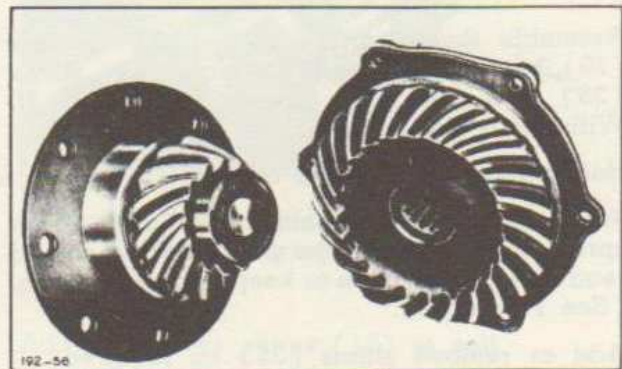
3rd Reduction Gears Removed to Note Imprint due to Tooth Contact
